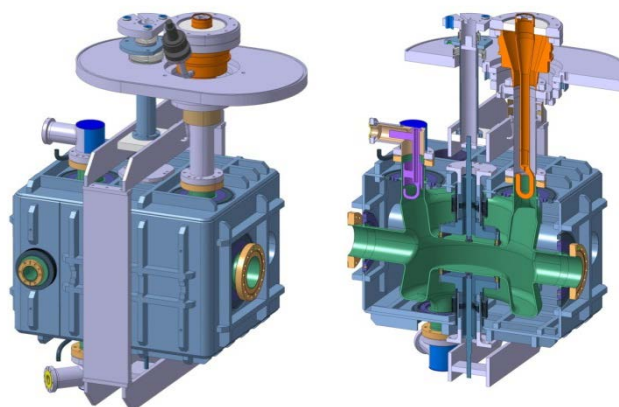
Left: The DQW cavity inside its helium tank with the field probe port (front), beam port (right) and tuner frame around. Right: sectional view of the DQW cavity inside its helium tank with the power coupler (top right, orange), HOM coupler (left, top and bottom) and tuner (centre, top and bottom).
